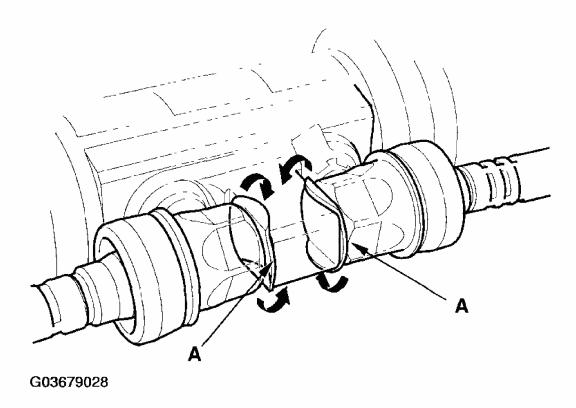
Bending Lock Washers Courtesy of AMERICAN HONDA MOTOR CO., INC.
